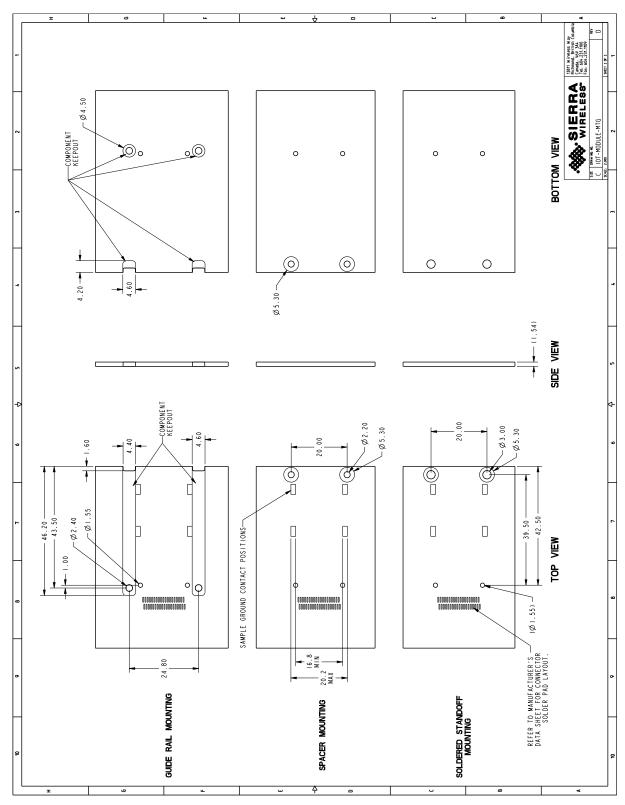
Module-side Mounting Details (Single-width Modules)
